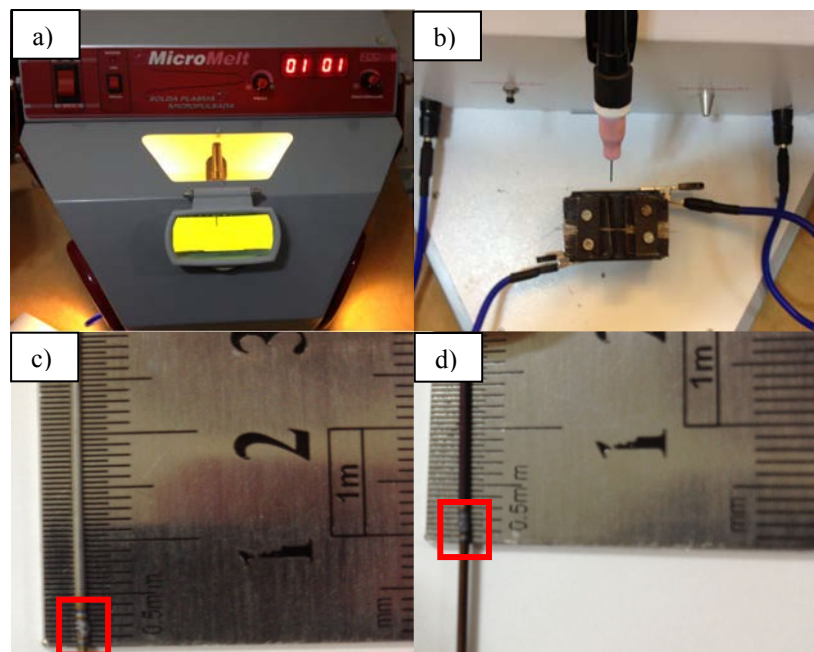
Scheme of welding process: a) Micromelt EDG welding machine. b) Mounting of the fixture for welding the wires. c) Detail of welded wire without thermal treatment. d) Detail of welded wire with heat treatment.
